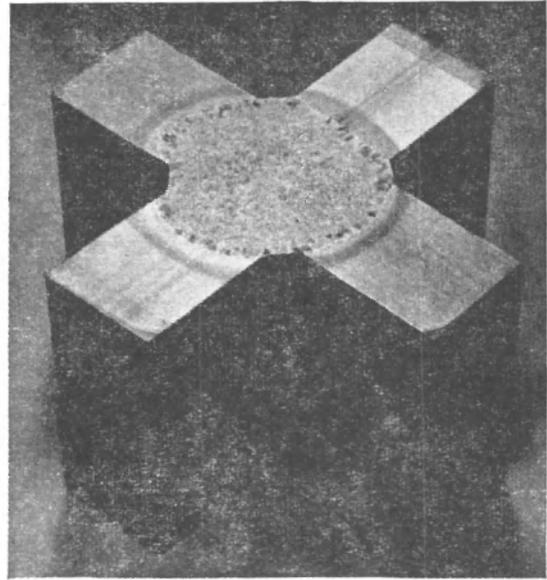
Macrosection of the cross weld between 2 in. thick plates, for which two consumables guides were used.
